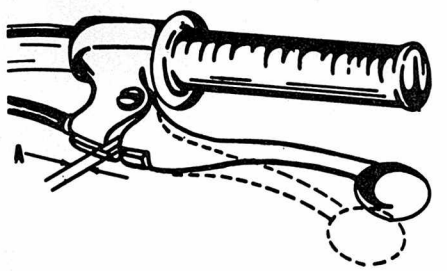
Clutch hand lever should have 0.039-0.078 in. free play at A.
